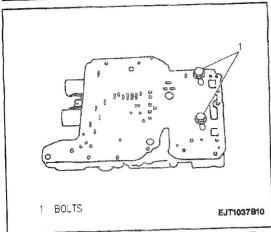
Installing Separator Plate and Gasket To Lower Valve Body
